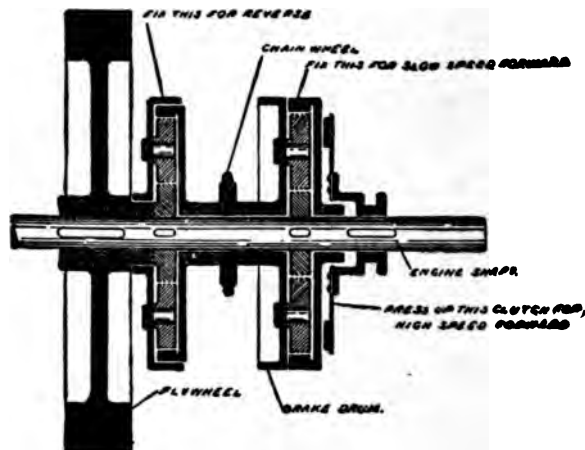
Section of Epicyclic reverse and slow forward gear.
